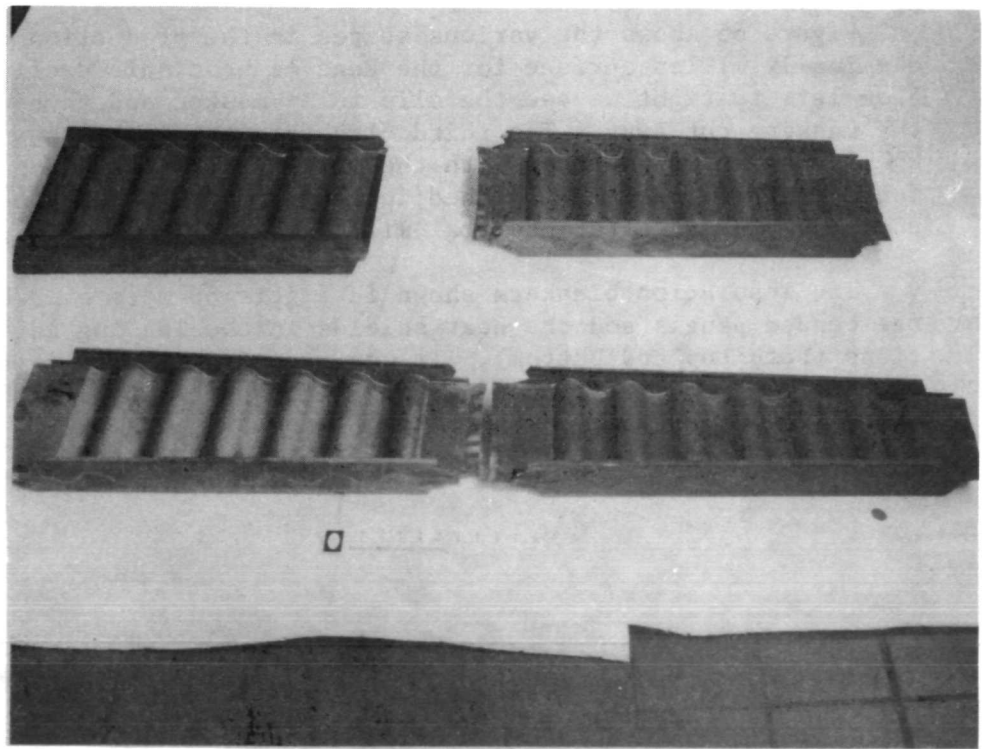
Set of Leading Edge Rib Assemblies As-Welded and Aged (Ready for trim and fitup in final assembly.)
